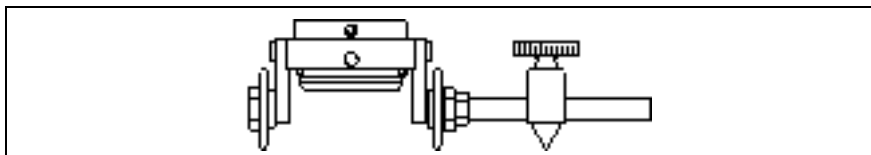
ABIPLAS® CUT 200 W circular torch guide
